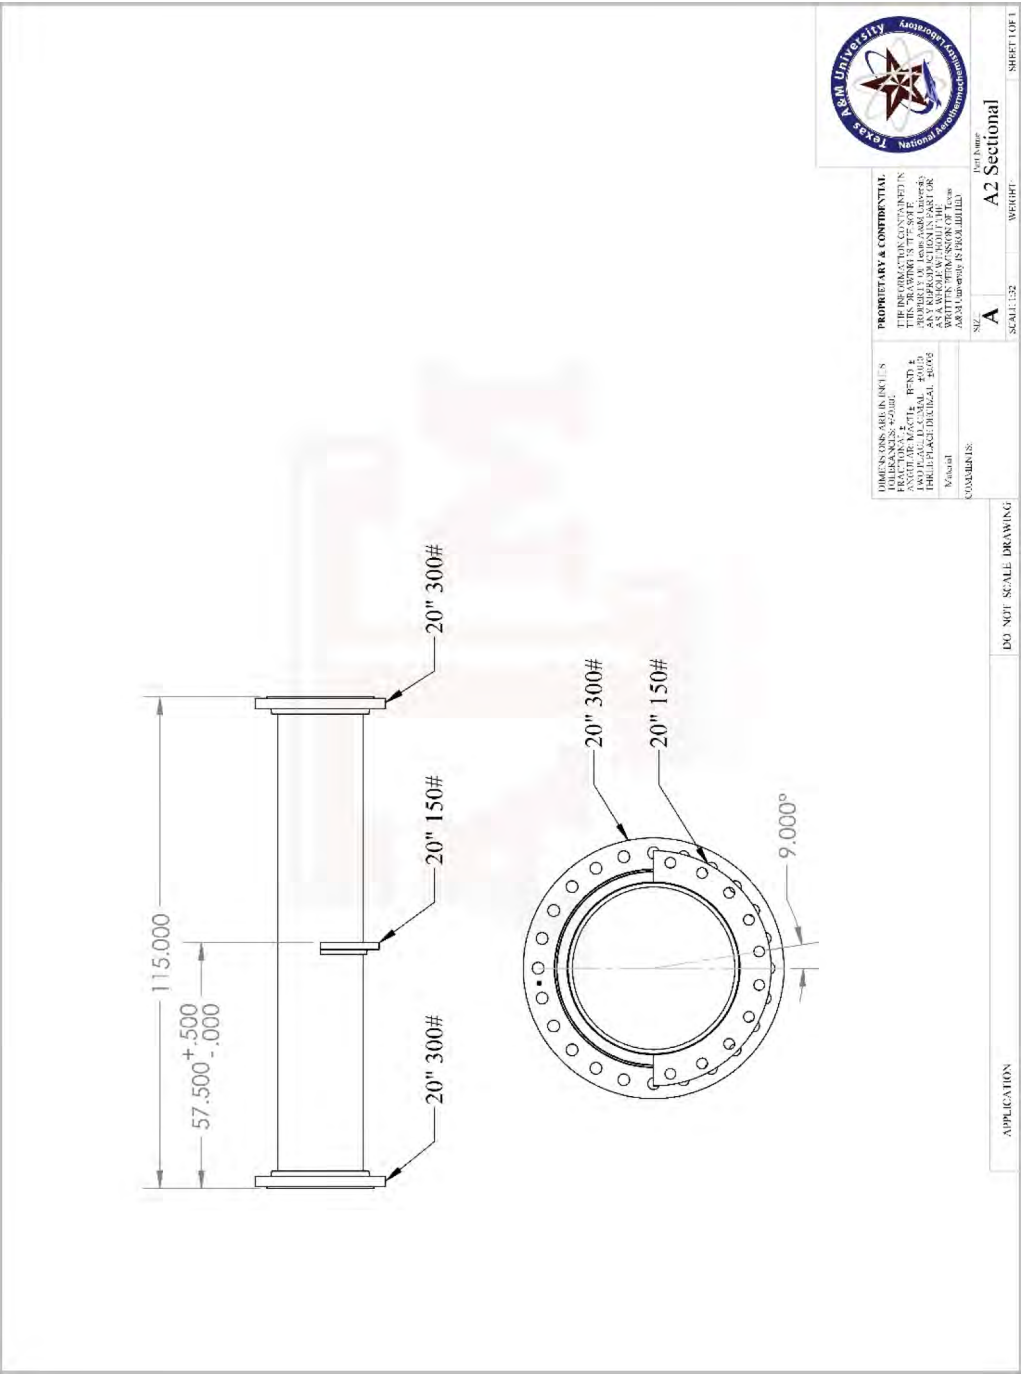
SECOND ACCELERATOR SECTION DRAWING SUBMITTED TO CIRCLE H MANUFACTURING FOR ASME CERTIFIED HIGH PRESSURE WELDING.
